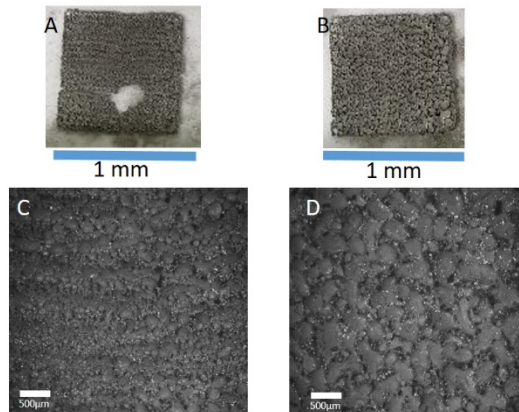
Pictures and optical microscopy images of 4-h cryomilled powder degassed at 350 °C for 6 h and laser welded at 100 mm/s and 50 (A and C) and 100 W (B and D)
